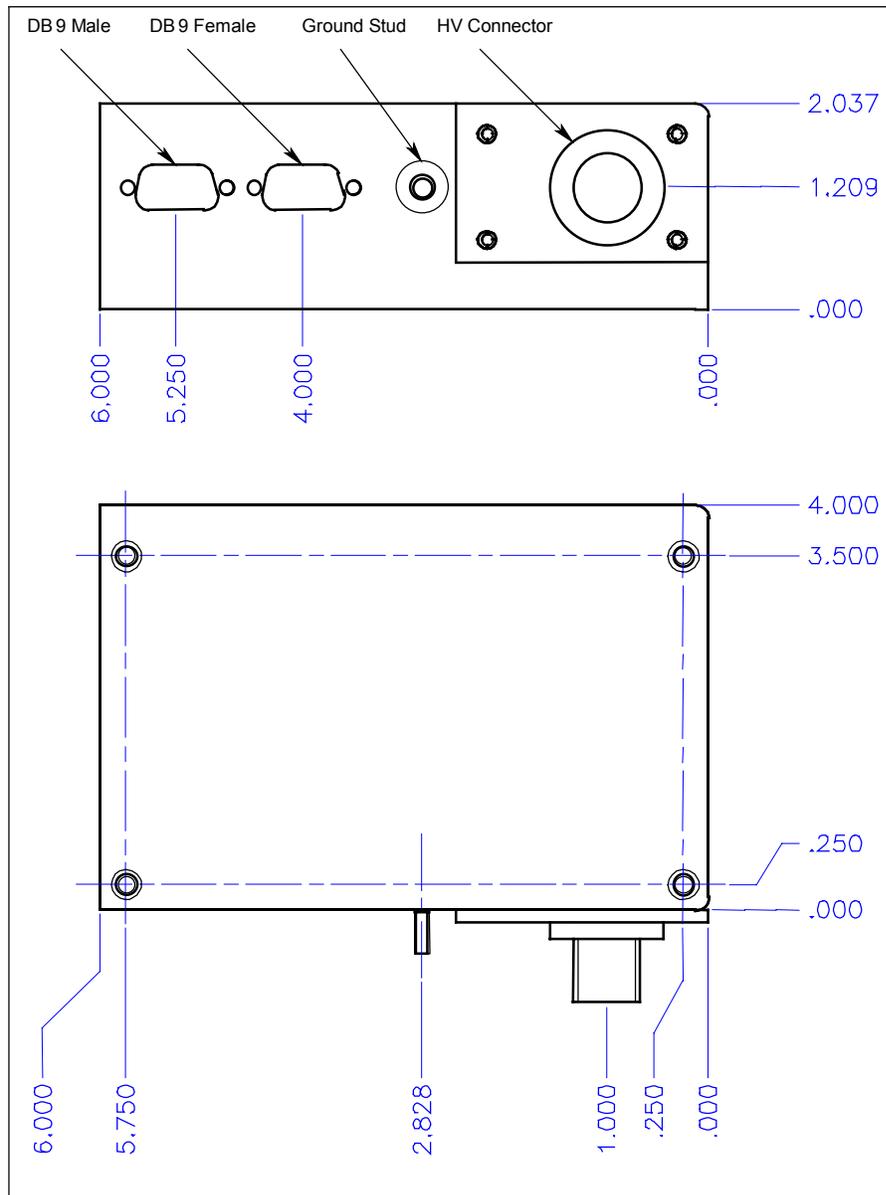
Physical layout showing the placement of mounting holes on the bottom panel of 2591P power supply
